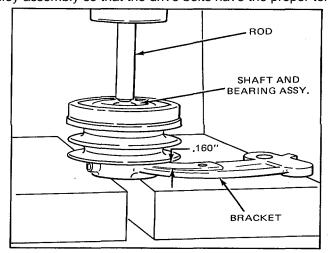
Installing Shaft and Bearing Assembly and Pulley in Bracket
